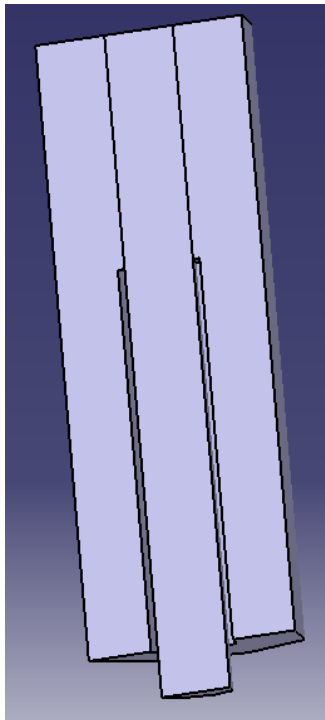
Isometric view pin ϕ 1 mould side.
